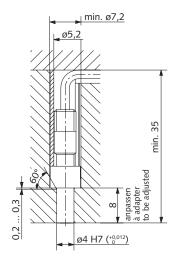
Mounting Type 6192B... with spacer sleeve Type 6459
